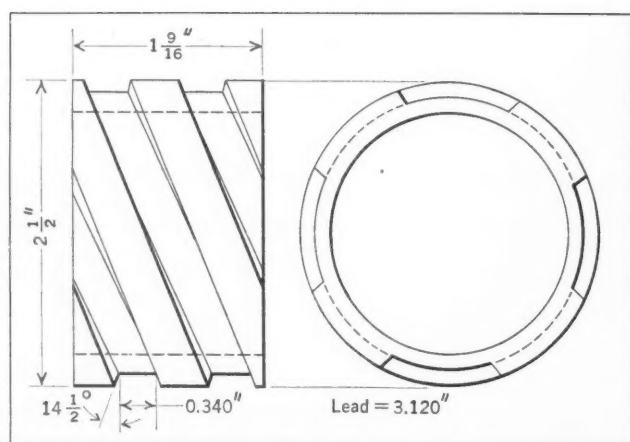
Sleeve Having a Quadruple Thread Cut in the Automatic Lathe Shown in Fig. 2
